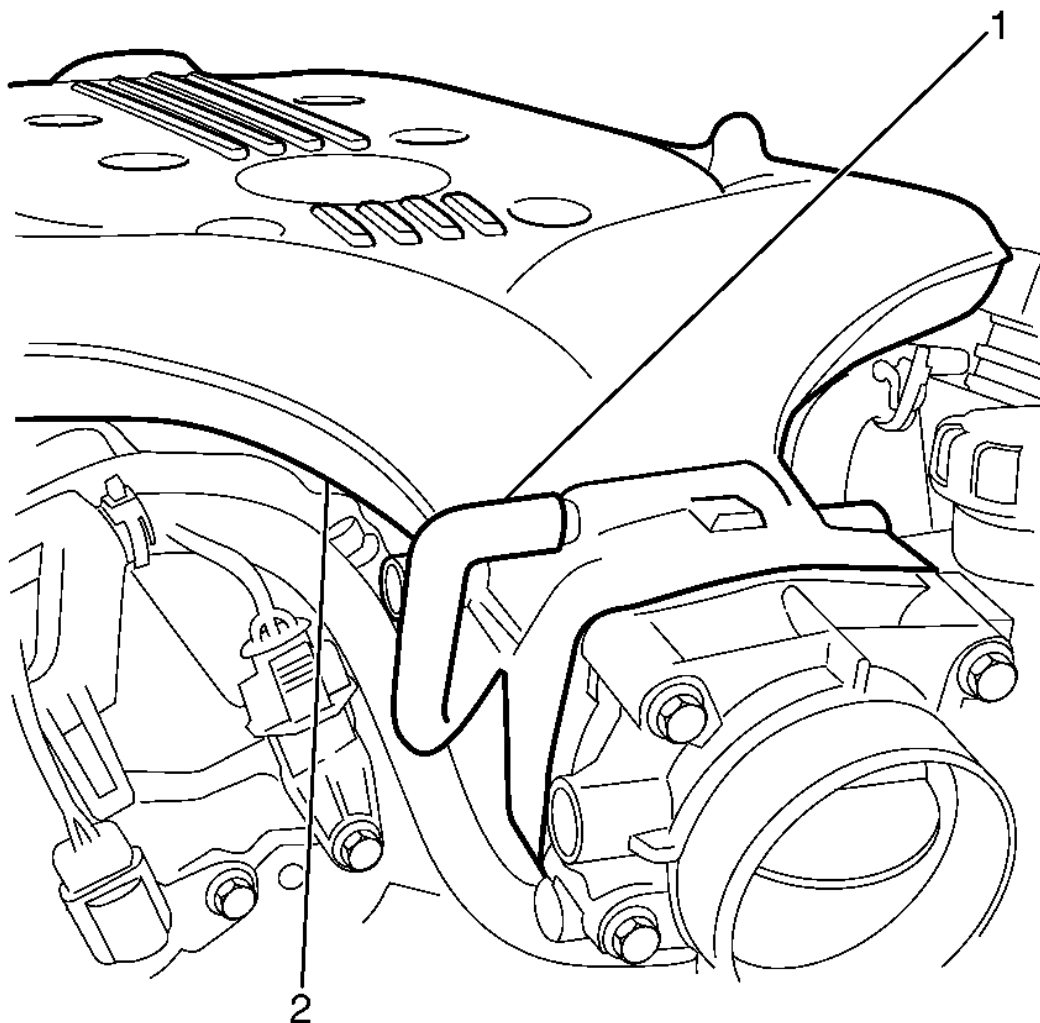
Identifying Upper Intake Manifold Bolts
